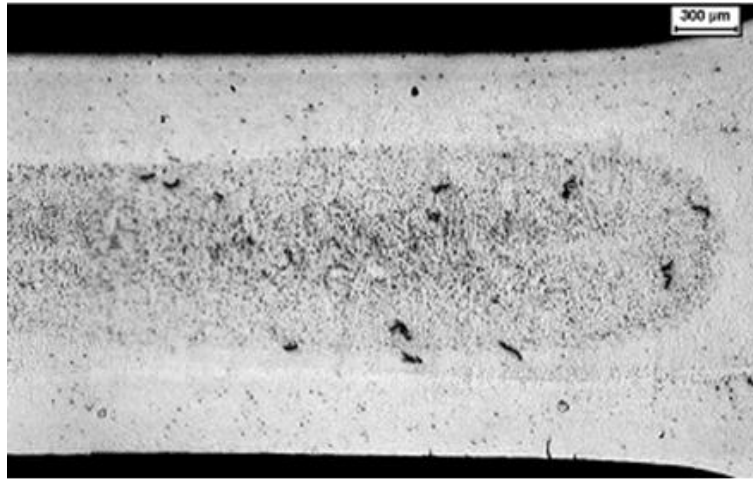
Weld nugget with remelted edge (*Den Uijl & Smith, 2006*).
